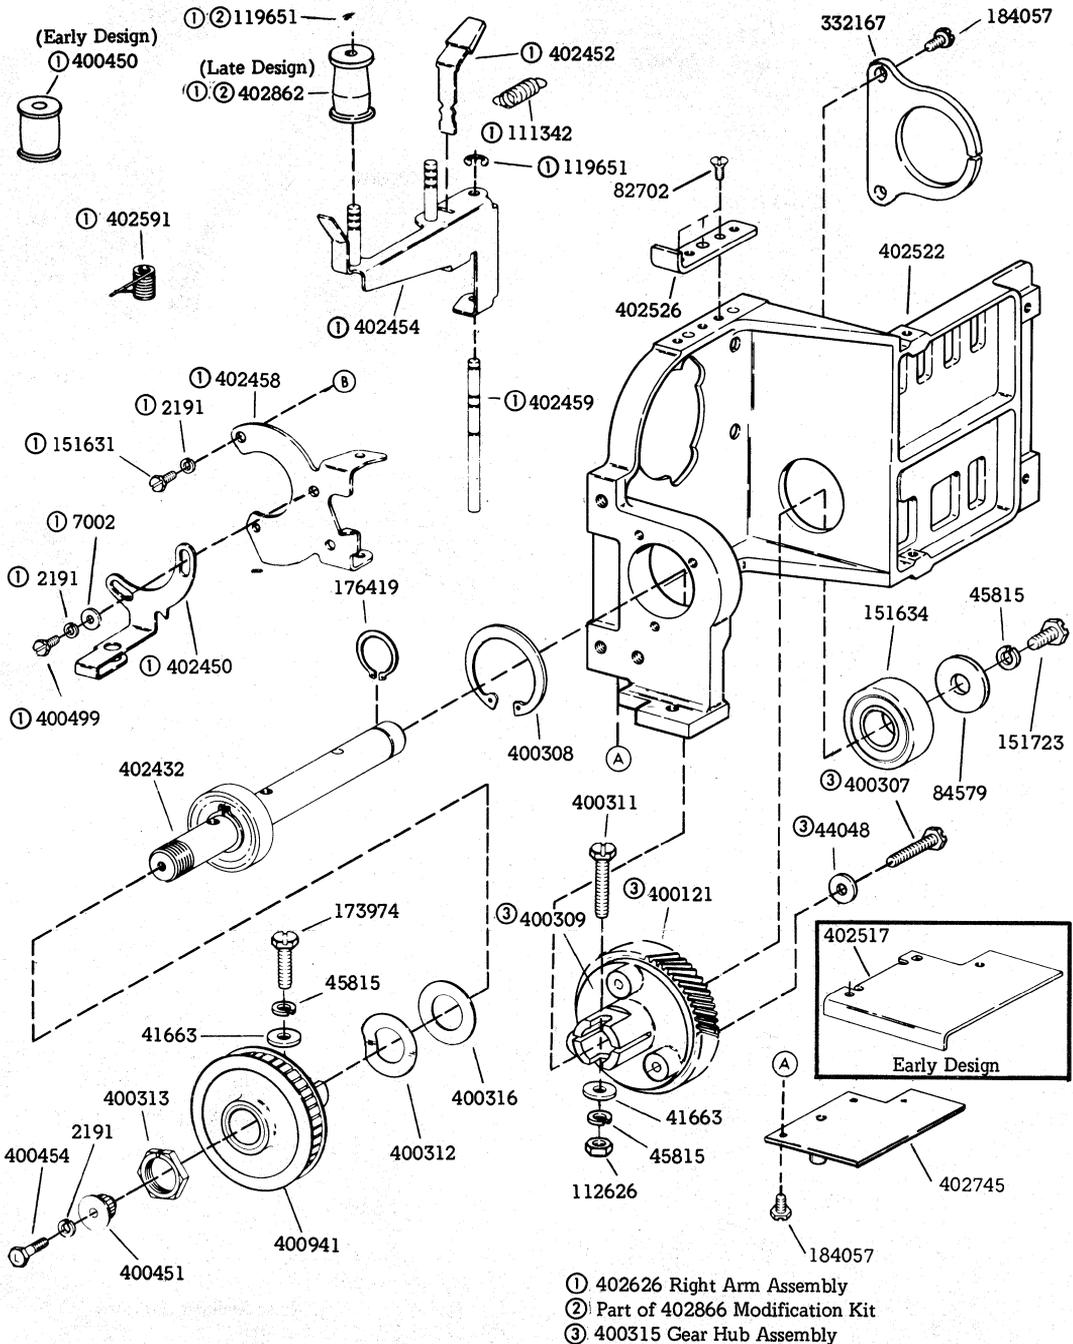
402622 Right Casting Assembly (Tractor Feed - 80-Column)
